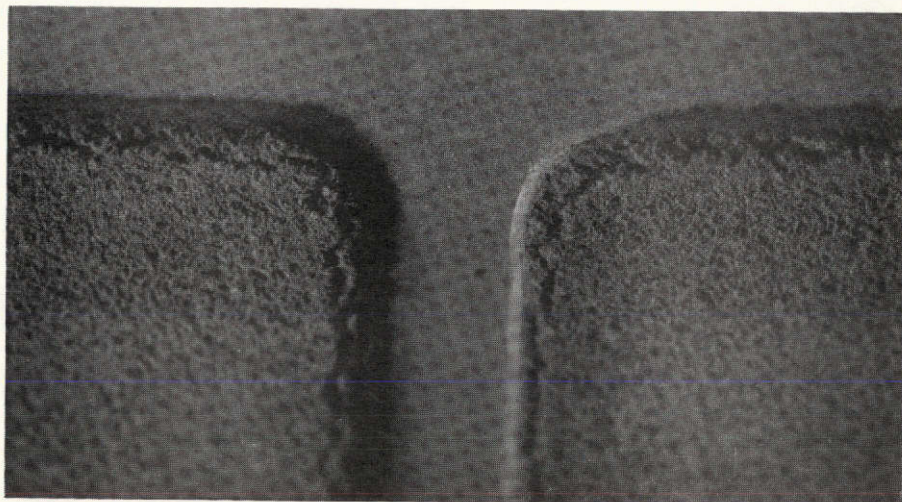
Supplier E Plaque Coined Corners Prior to Cutting
